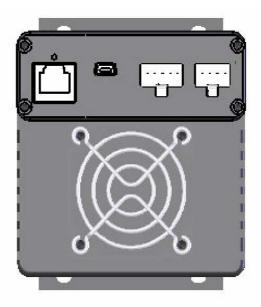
Standard Body (Type A) with Rectangular Flange (Type A) - Back View
